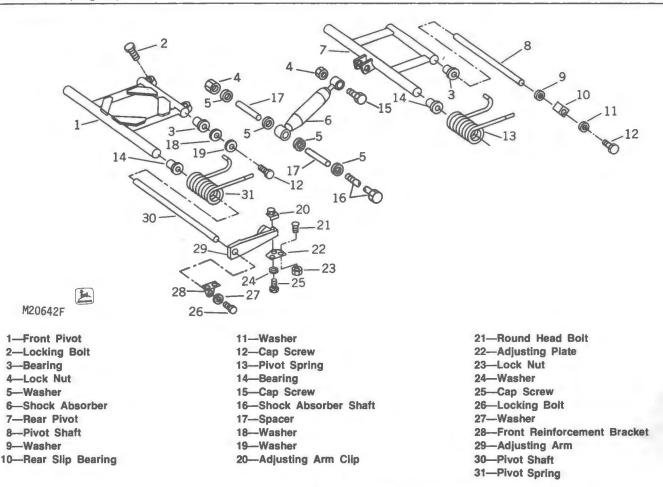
Exploded View of Slide Rail Pivots and Springs
